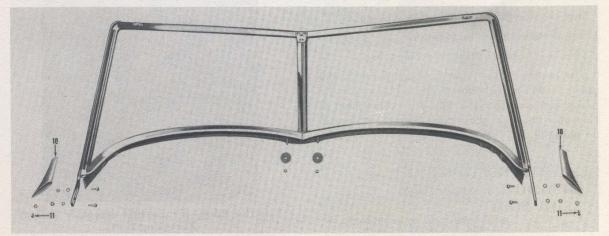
Windshield Assembly and Attaching Parts as Removed from Body. 10. Windshield side support to cowl bracket 11. Windshield side support to cowl bracket screw
